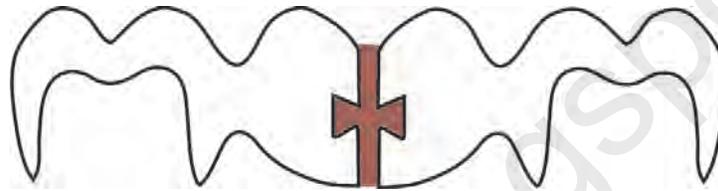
A mechanical interlocking design between two parts joined by cast-metal.
